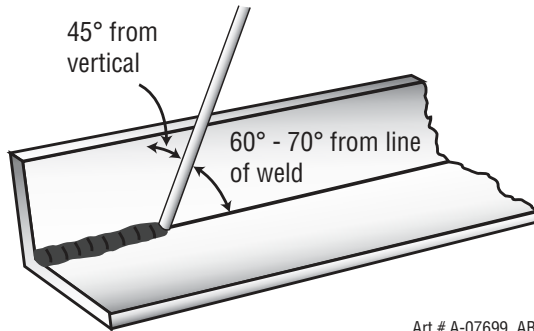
Electrode Position for HV Fillet Weld
